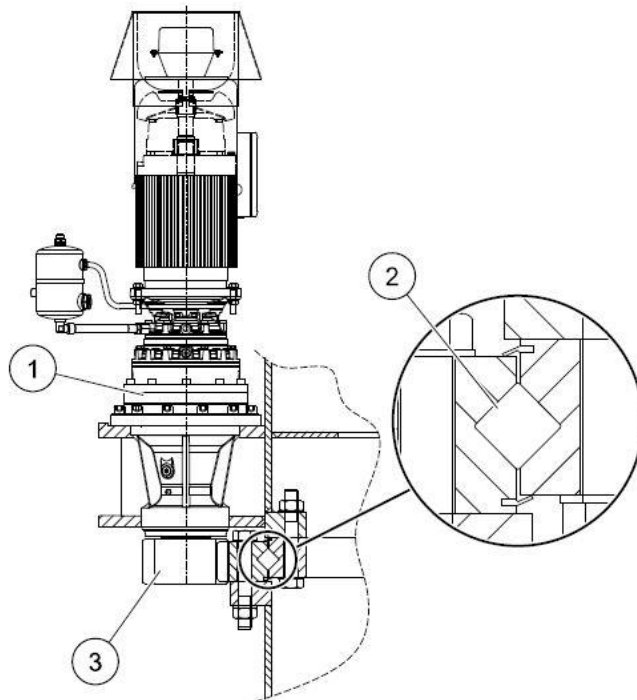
Lubrication intervals and requirements for the trolley slewing machinery
